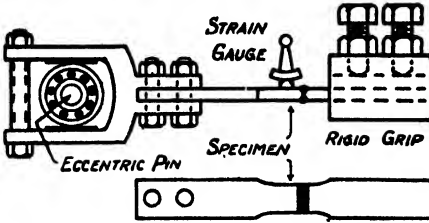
METHOD OF TESTING BUTT WELDED JOINTS
